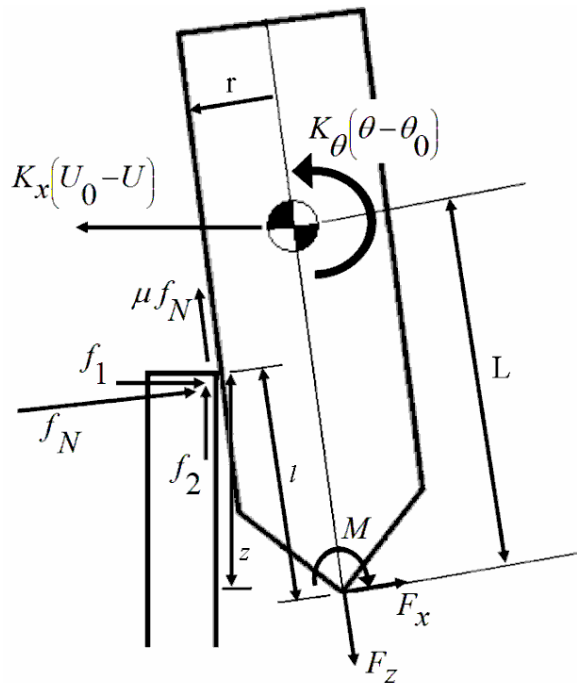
Peg and hole geometry and free body diagram for the one-point contact phase of assembly.
